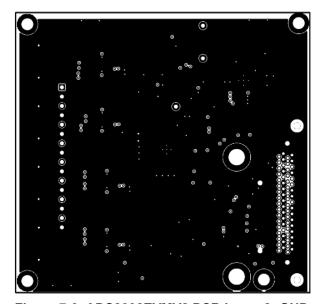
ADS8332EVMV2 PCB Layer 2: GND Plane
